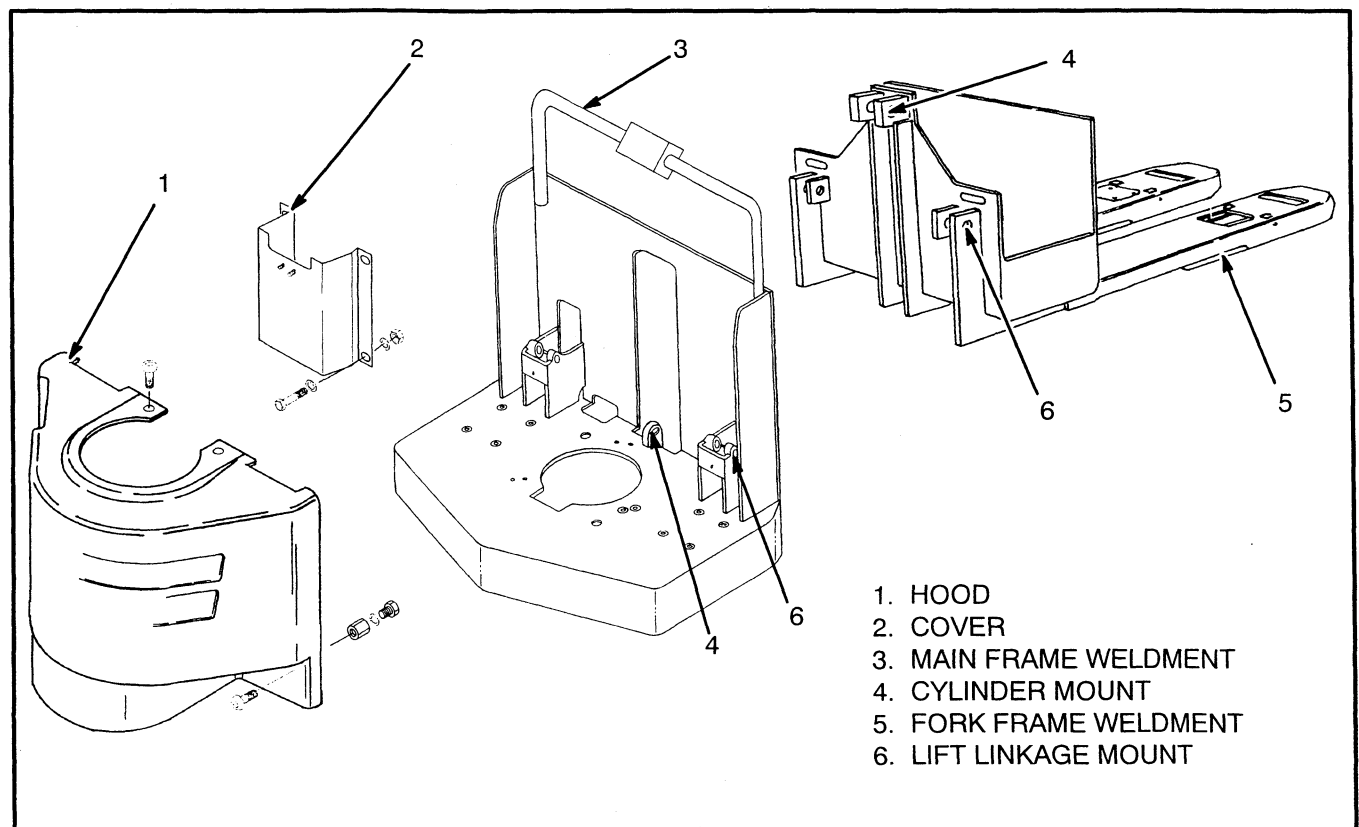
FRAME WELDMENT - B60-80XT
